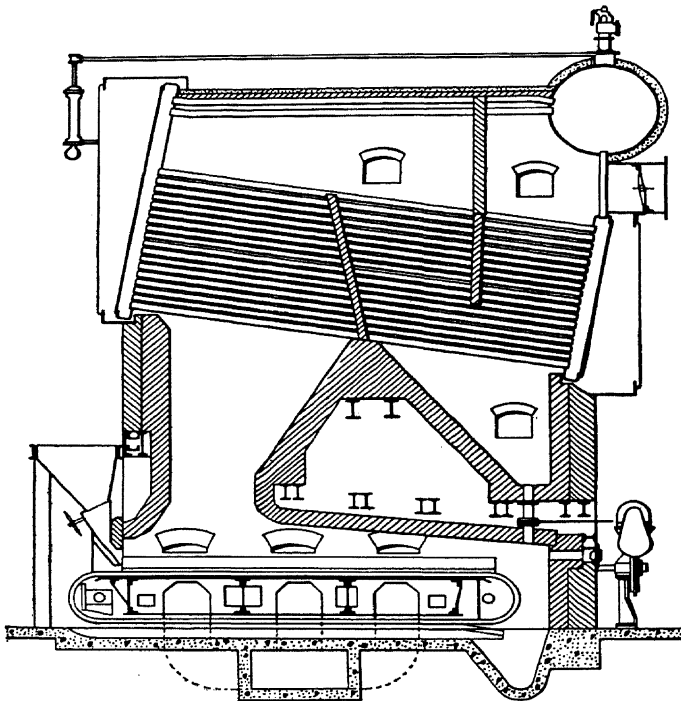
Furnace for a chain-grate stoker designed to burn No. 3 buckwheat under a 5,000 sq. ft. boiler.
